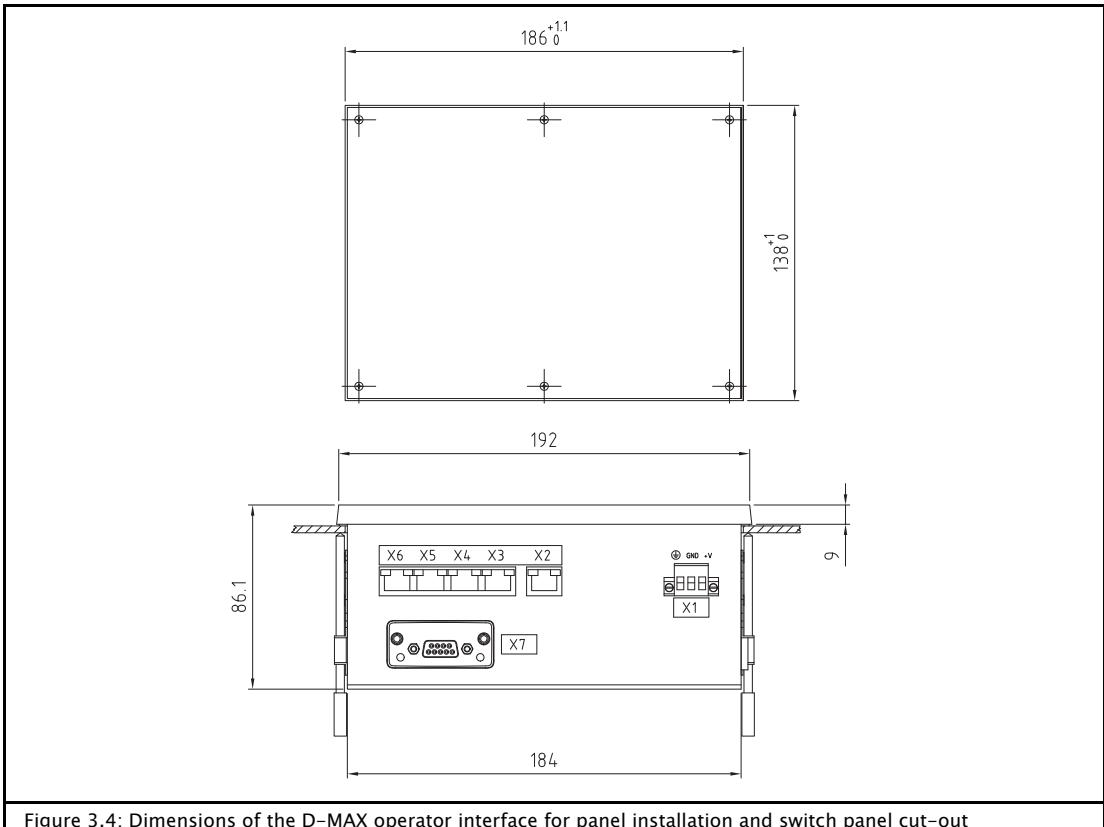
Dimensions of the D-MAX operator interface for panel installation and switch panel cut-out
